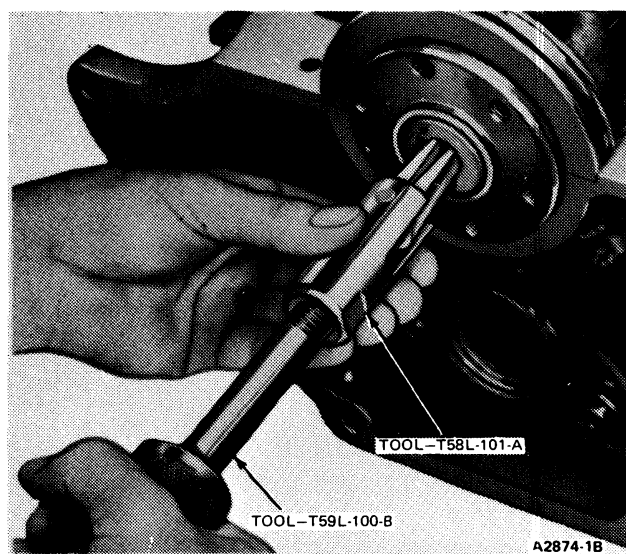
Removing Clutch Pilot Needle Bearing Assembly
